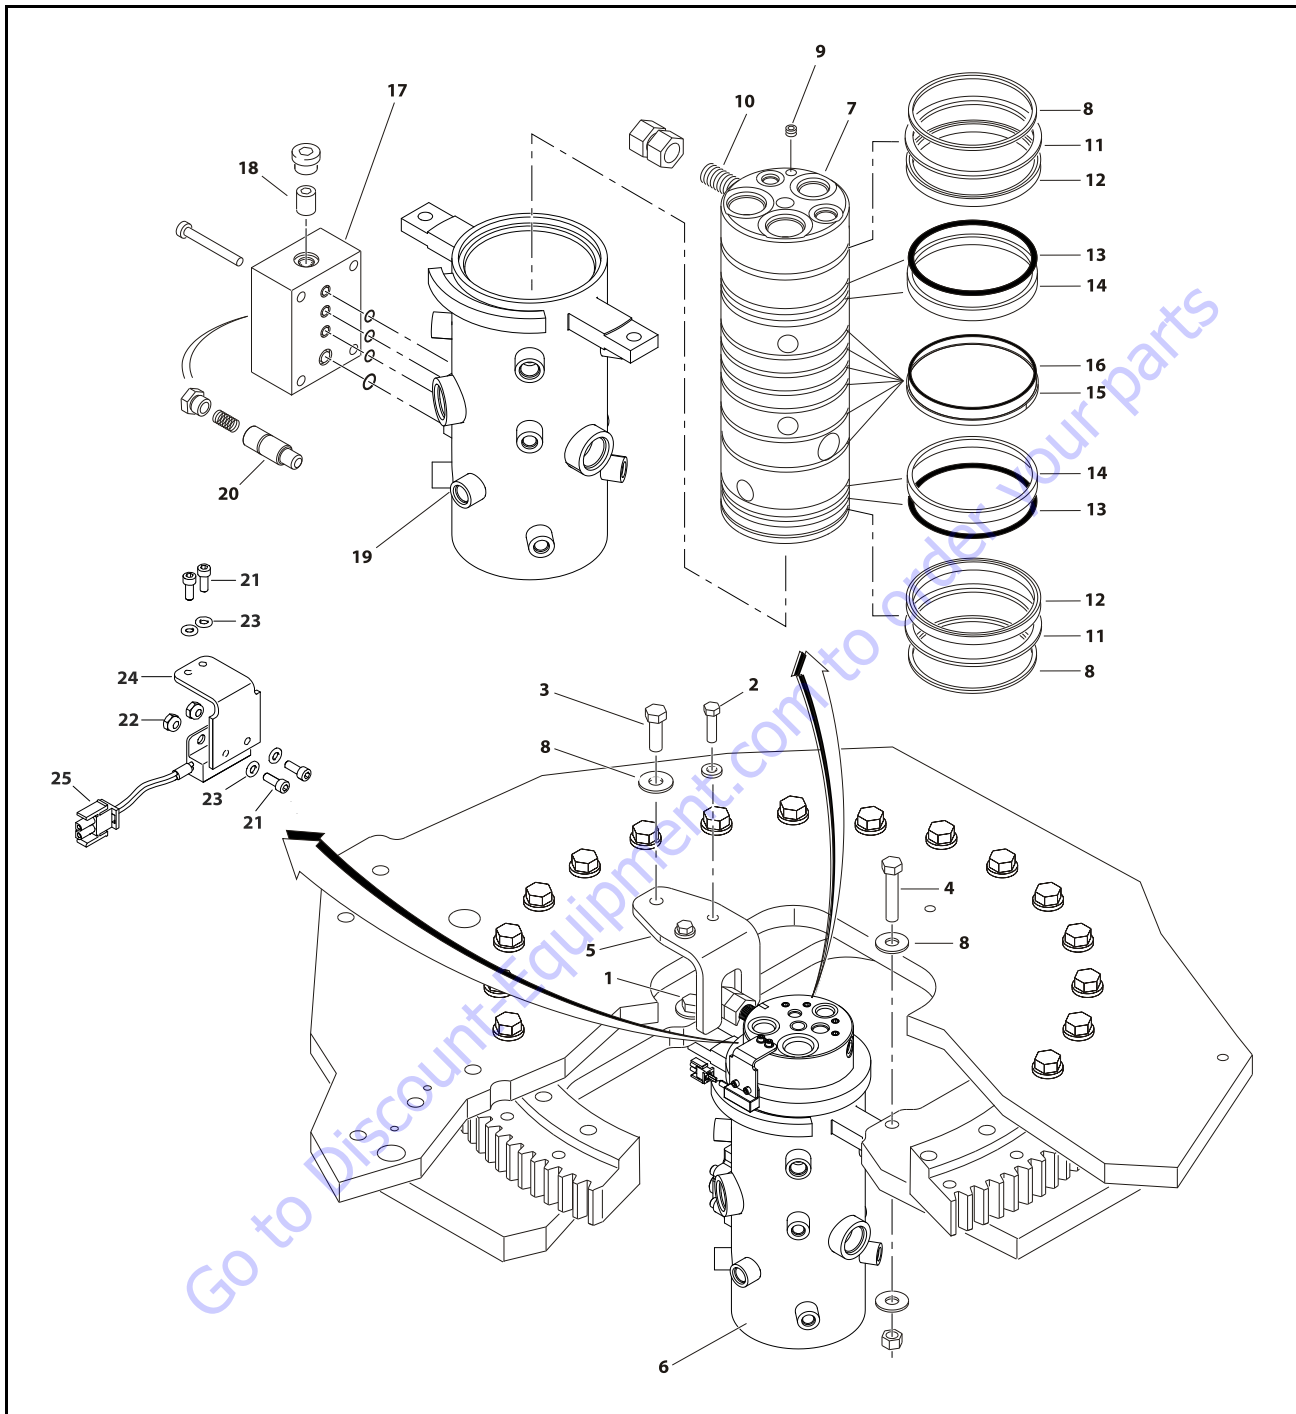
Rotary Coupling Port Location (7 Port) (USA Built Machines and China Built Machines, SN 0300138649 to Present and SN B300000100 to Present)
